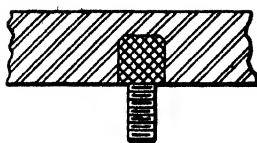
An insert with a shoulder flush with the face of the molding is better than one without a shoulder, as in Fig. 29, but may still give trouble through the tendency of the plastic to fill the thread.
